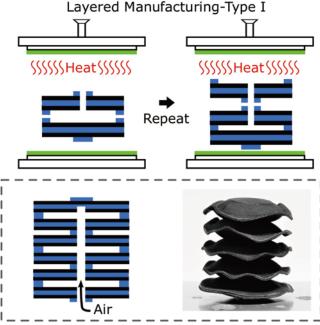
Assembly of the pieces in the first type of the proposed layered manufacturing.
